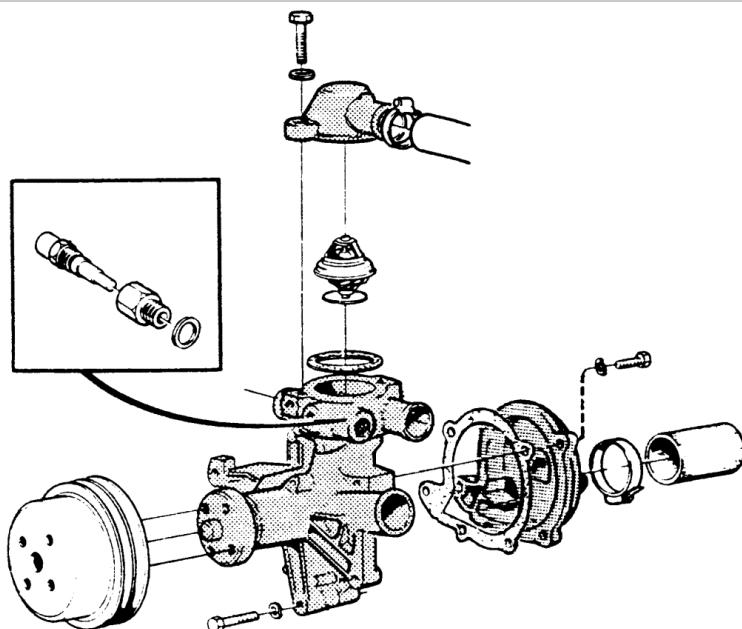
Exploded view of the water pump assembly on the 2.8L 6-cylinder engine
